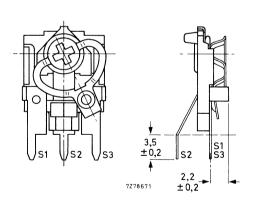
Test switch for horizontal mounting with adjustment knob at the side of the base plate.
